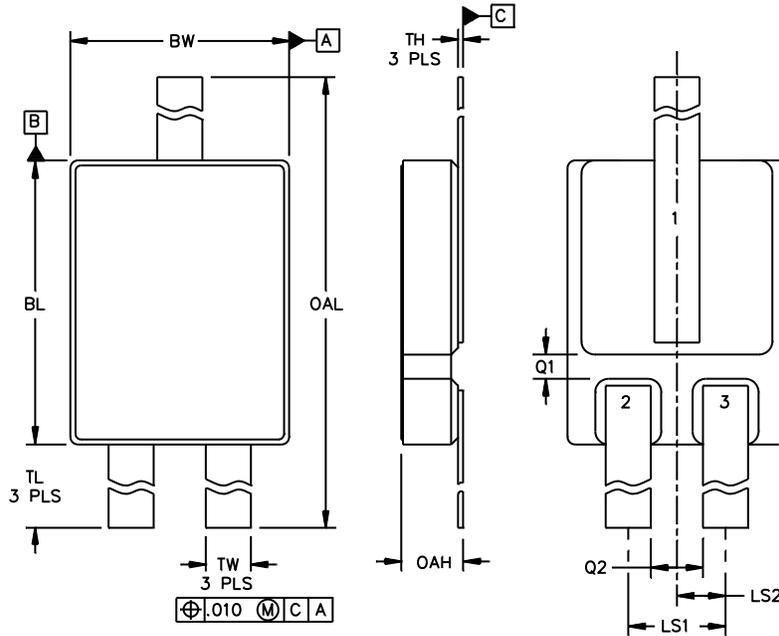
Dimensions and configuration of surface mount package outline, TO-276AB (2N7268U, 2N7269U, 2N7270U, AND 2N7394U).
